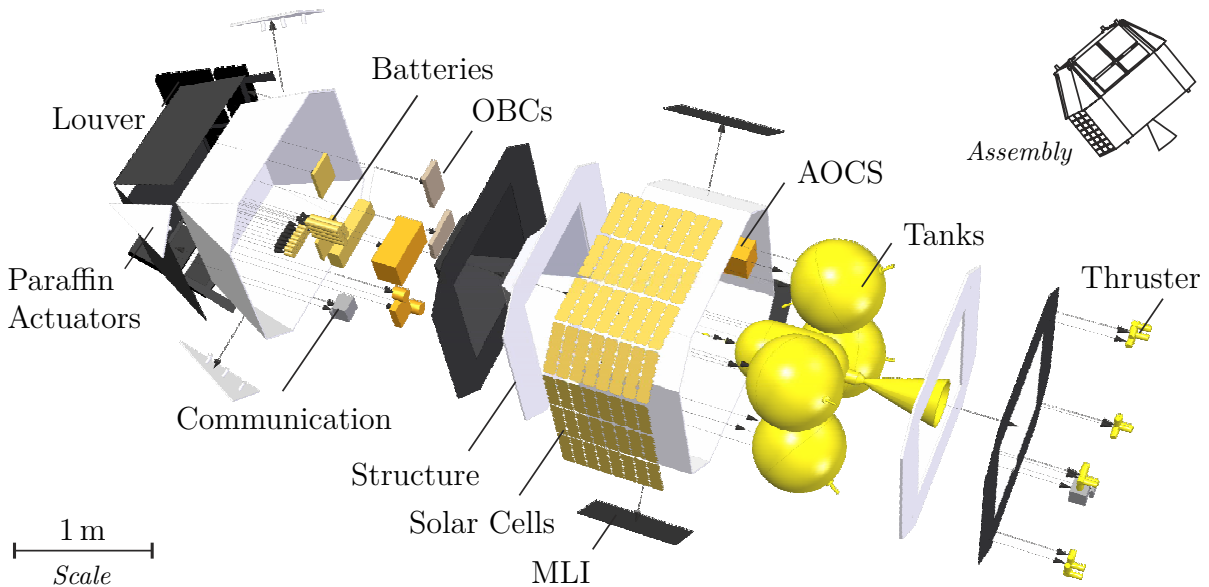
Exploded view and assembly of the De-orbit Kit.
